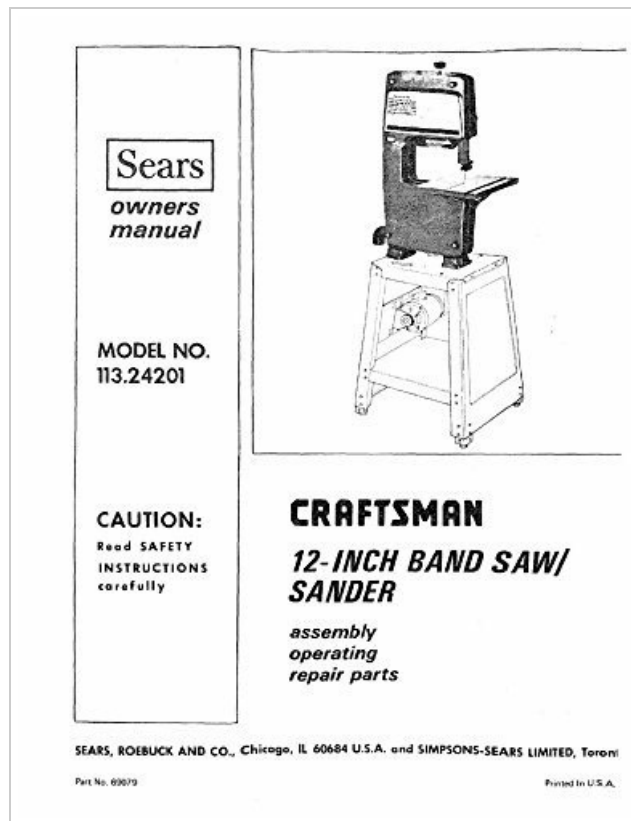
The Craftsman 113.24201 12-inch Band Saw/Sander, showing its dual functionality. The band saw blade is visible on the left, and the sanding belt mechanism is on the right. This image illustrates the overall design and key components of the machine.
